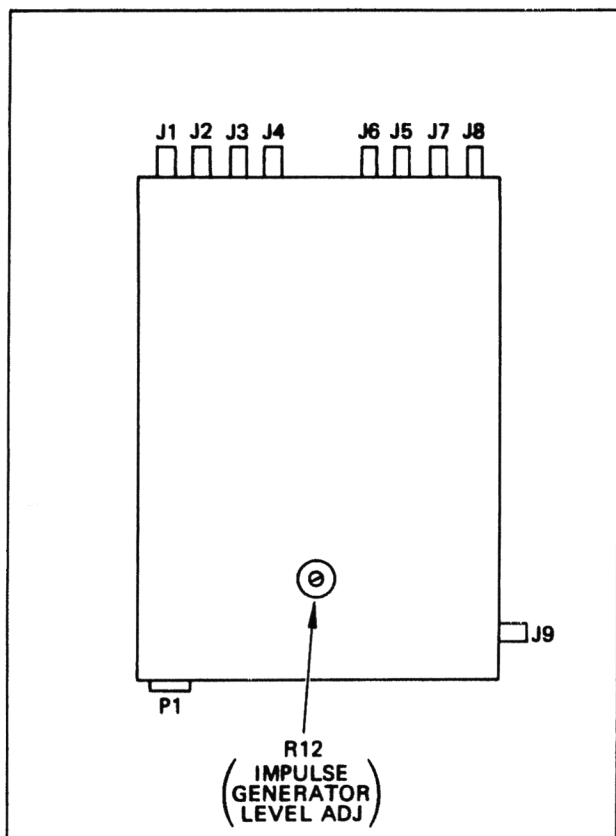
Trimmer Locations, RF Switch and Impulse Calibrator Assembly, A9
